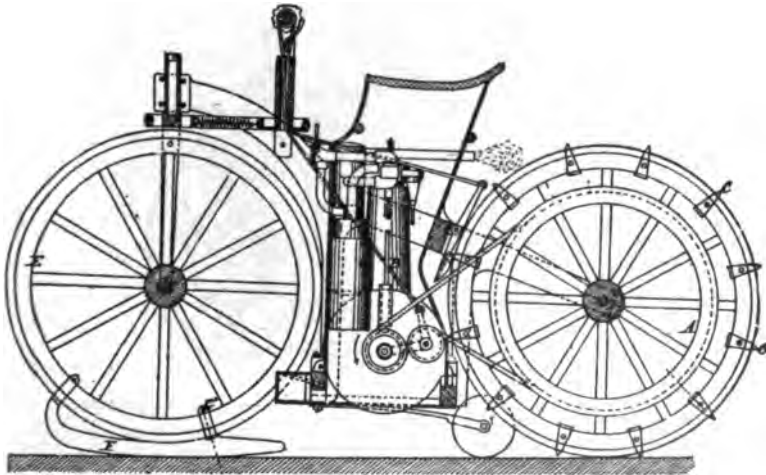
Sketch of Daimler's First Gasoline Propelled Bicycle. This machine is shown arranged for sliding on ice, having teeth, C, in the rear wheel, and the runner, F, secured to the forward wheel. E. A is the driving pulley on the rear wheel; B, the cylinder of the motor.
